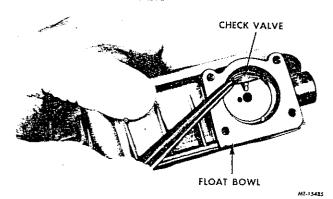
REMOVAL OR INSTALLATION OF THE PLASTIC PUMP INTAKE CHECK VALVE
